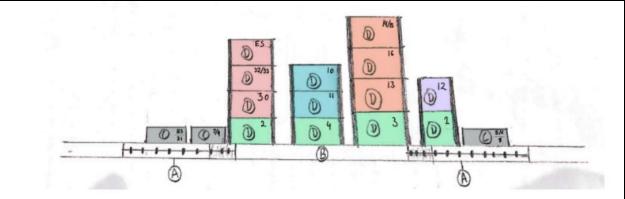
Top and front view for the workstation redesign (video: toaster assembly v1)
